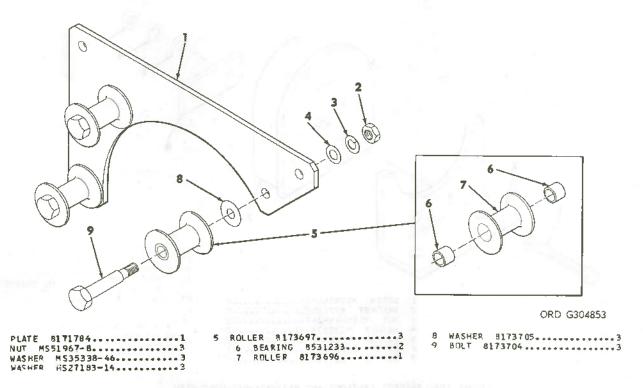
ROL1 ER /8171783/-EXPLODED VIEW /SEE FIGURE 168 FOR NEXT HIGHER ASSEMBLY/
